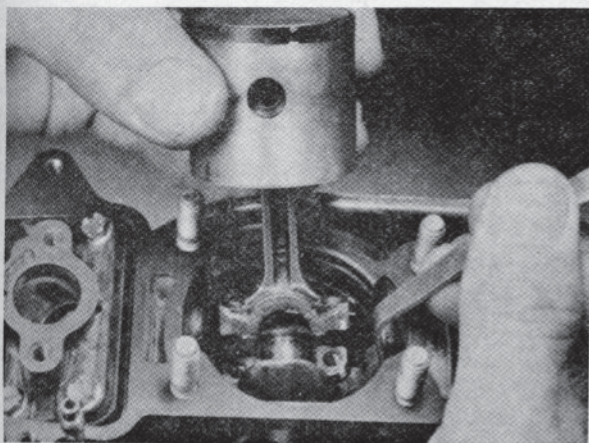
Installing piston and connecting rod assembly using locally made tool to hold rod cap in position. Tool can be made from flat strip of metal. Using grease, stick 14 rollers in cap and 14 rollers in rod; make sure that match marks on rod and cap are aligned.
